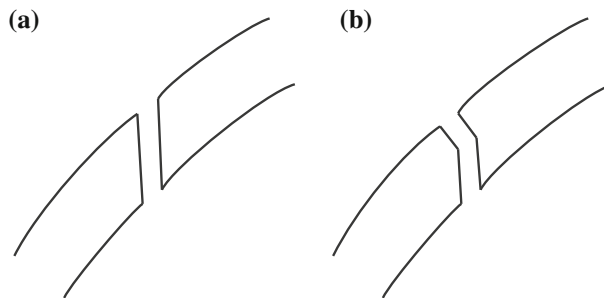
Brittle and shear fracture of bomb casings. a Shear fracture, b combined brittle and shear fracture
